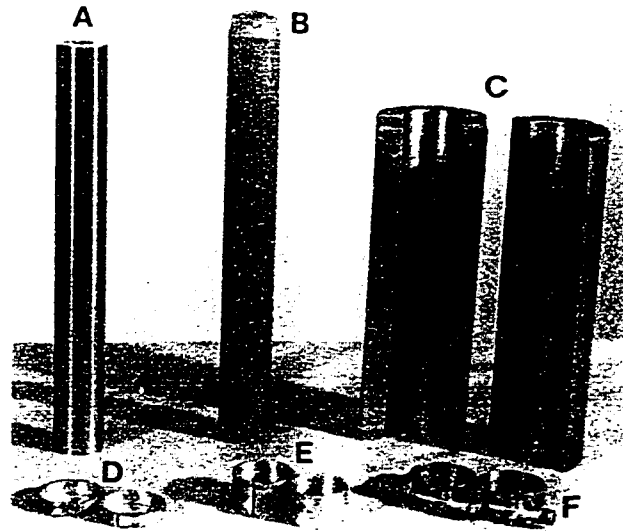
Mold components used for composite tube manufacturing; (a) steel mandrel without bladder, (b) steel mandrel with installed silicone bladder, (c) external stepped molds (2 part), (d) mandrel centering spacers, (e) clamp fittings, and (f) T-Bolt clamps.
